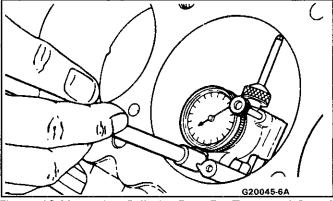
Measuring Cylinder Bore For Taper and Out of Round
